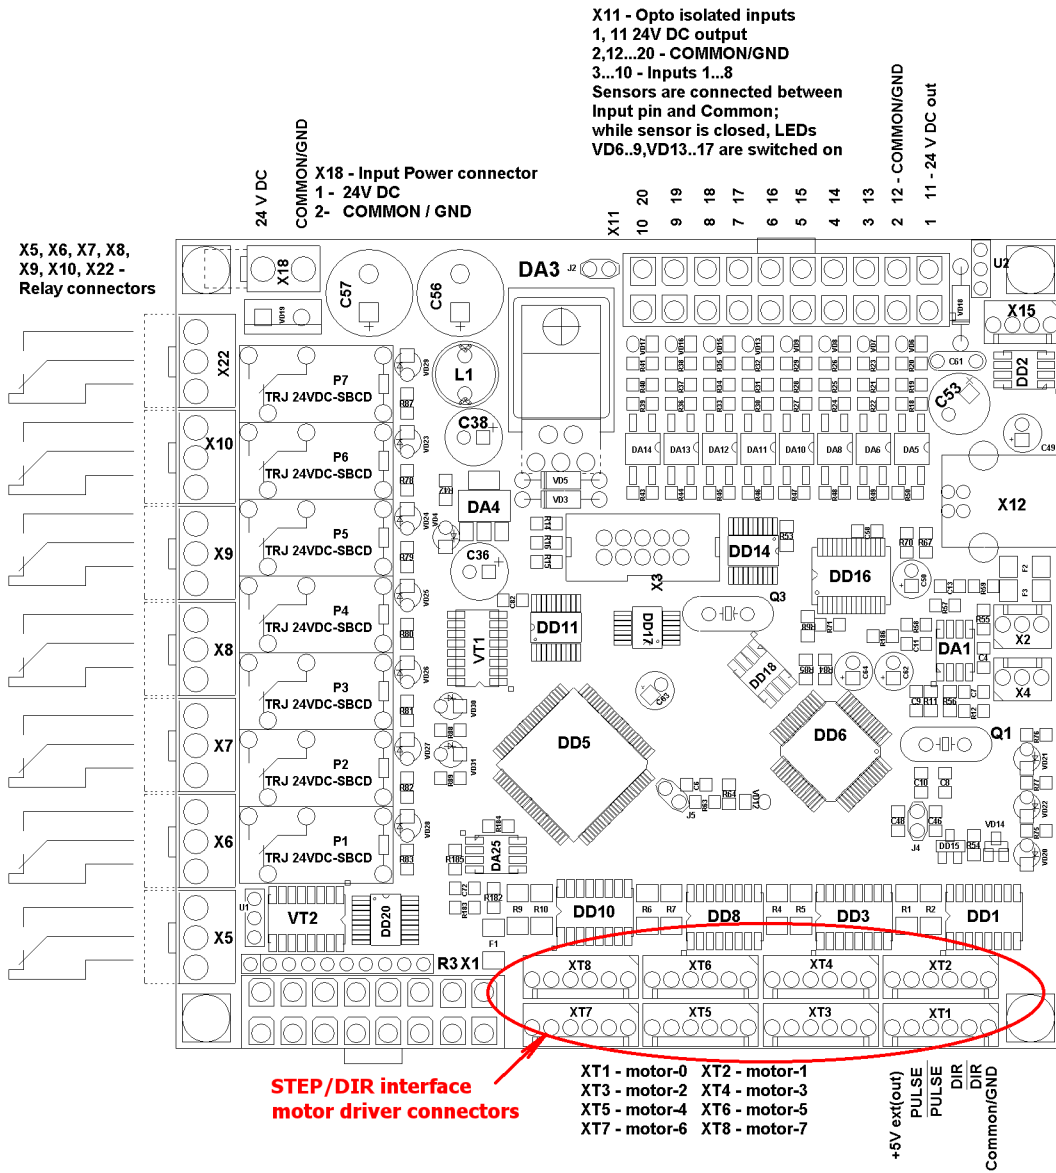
myCNC-UP3 board outline. STEP/DIR motor interface connectors.
